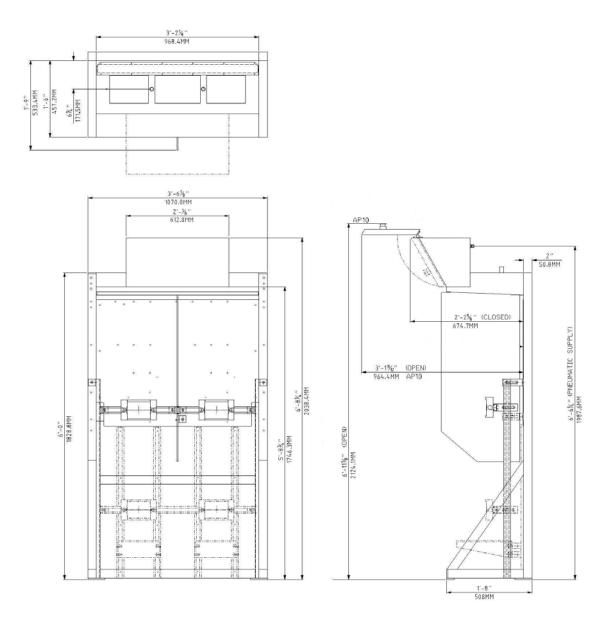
Outline Dimensions 1x1 Cylinder Cabinet
